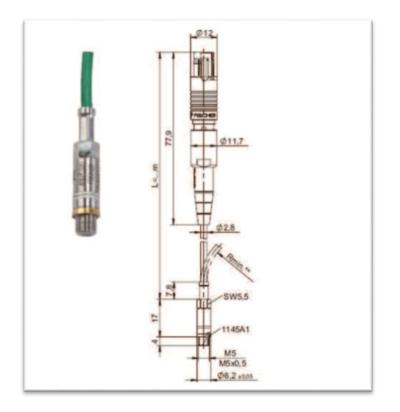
Kistler 4007...DS pressure sensor for intake manifold.
